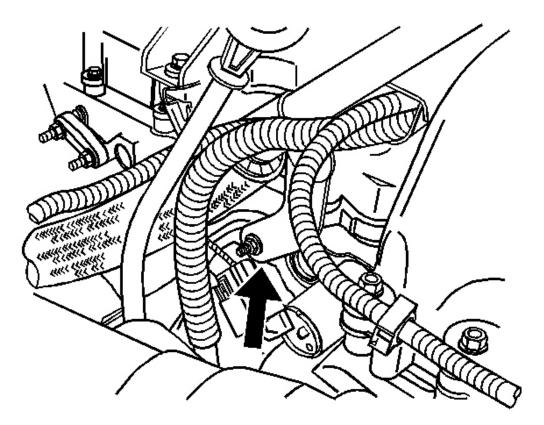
View Of Oil Level Indicator Tube Bracket Nut Courtesy of GENERAL MOTORS CORP.
